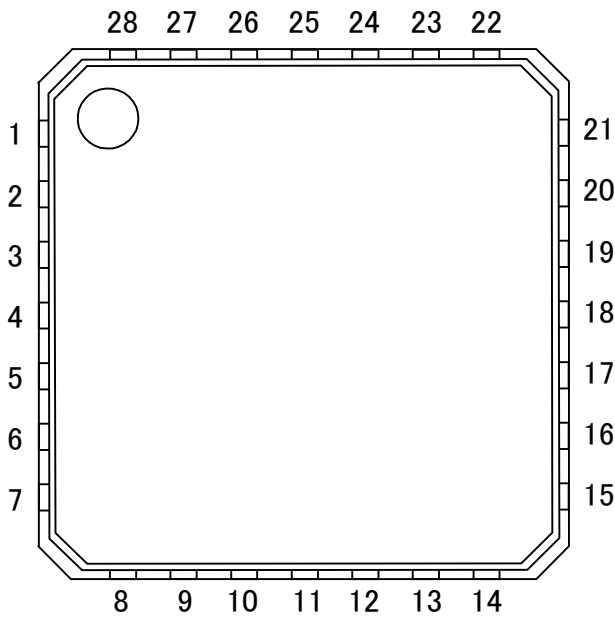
Package Dimensions ( Quad Flat No-Lead 28pin )
